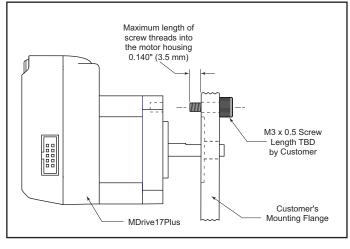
MDrive17Plus Mounting Screw Depth
